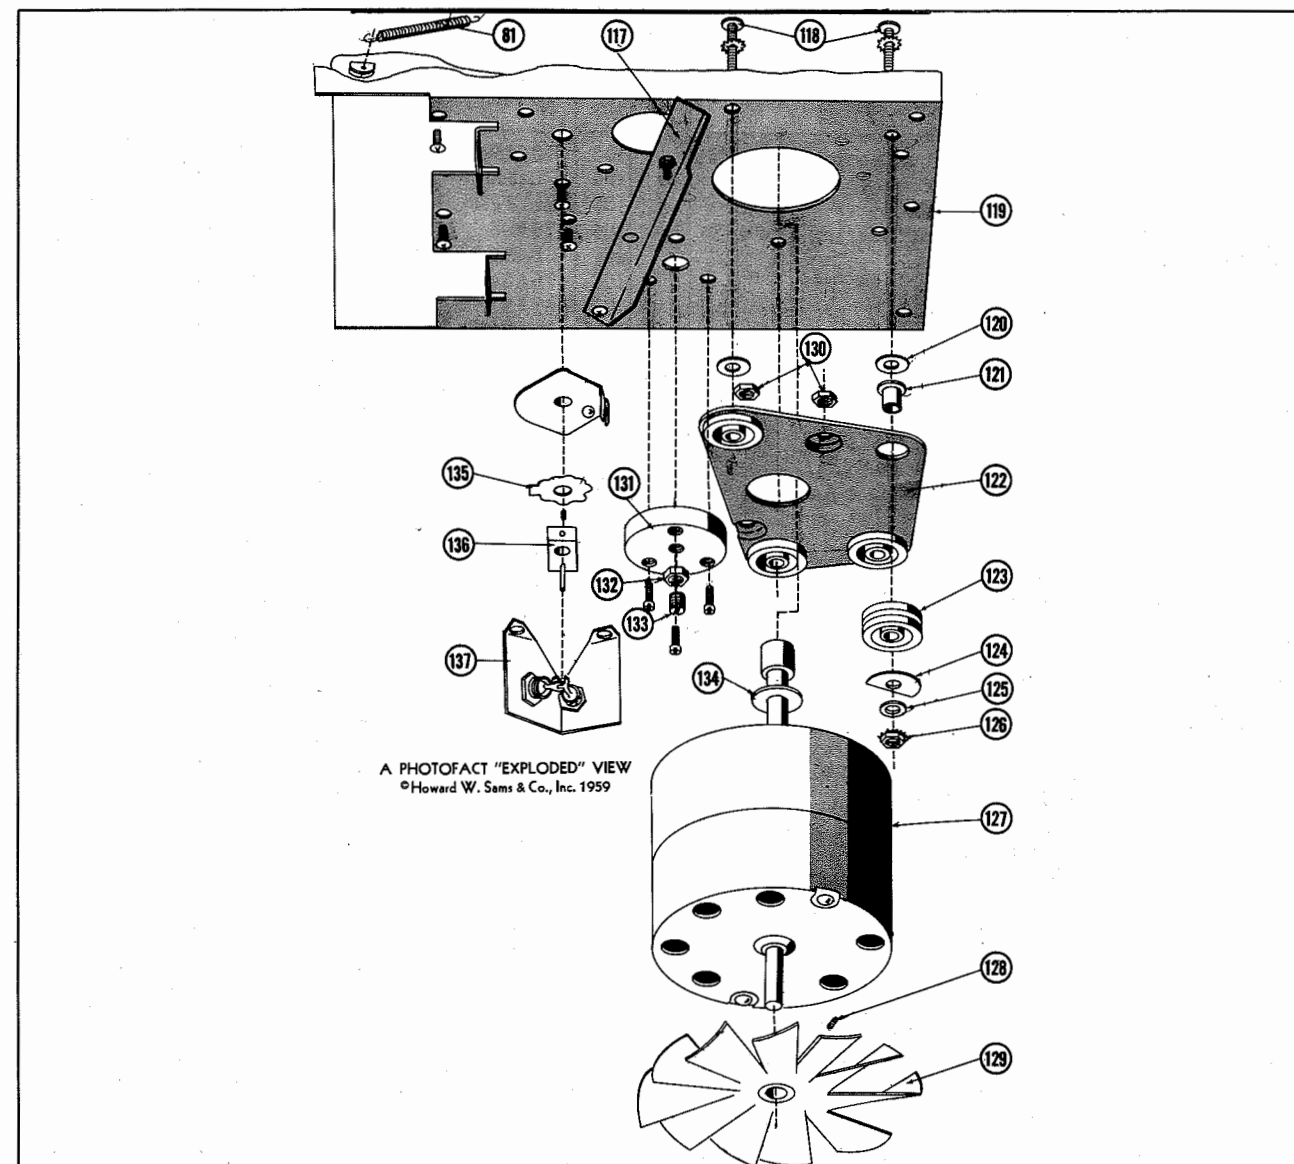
C EXPLODED VIEW OF PARTS BELOW BACK PANEL
